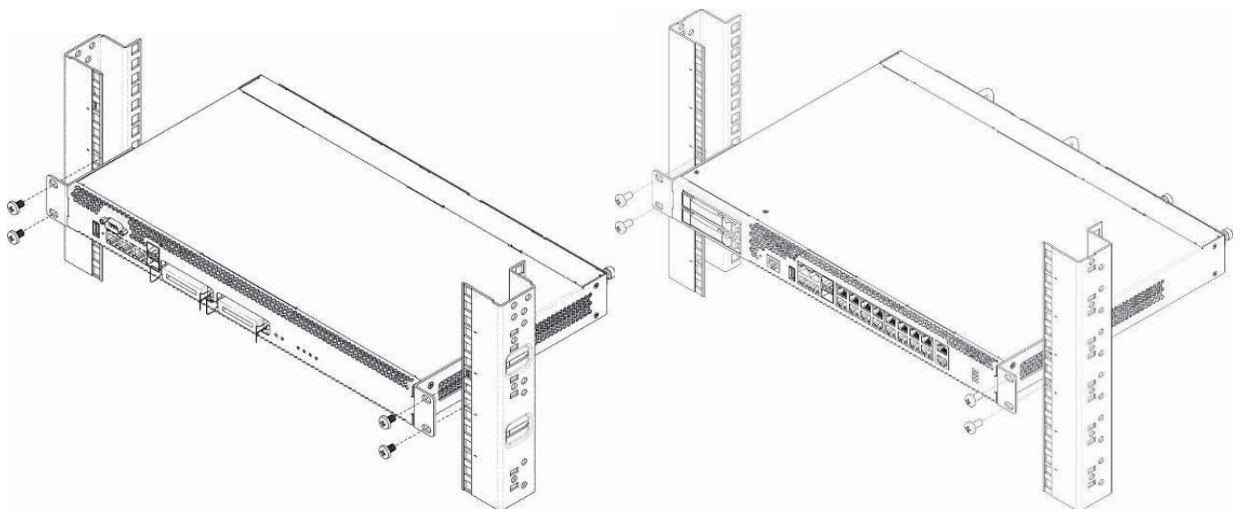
Device rack installation for SMG-1016M (left-hand side) and SMG-2016 (right-hand side)
